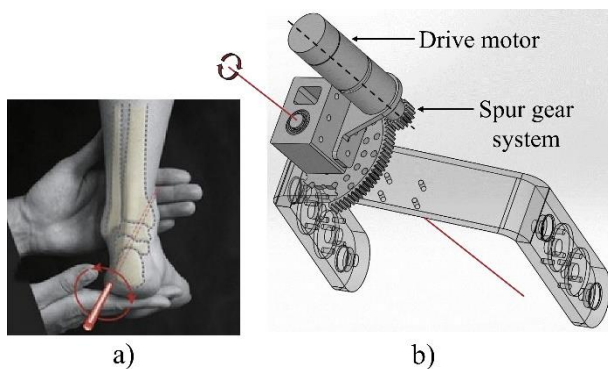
The axis of rotation and osteo-kinematics at the inv-/ eversion assembly a) component axis (red) [8]; b) developed inv-/ eversion assembly.
